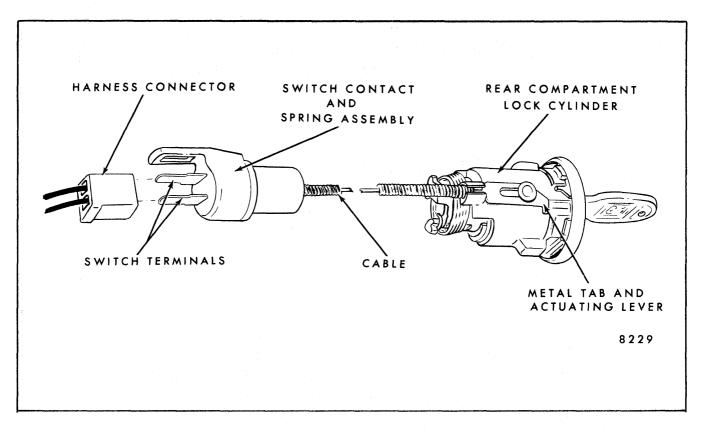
Rear Compartment Lock Cylinder And Switch Assembly
